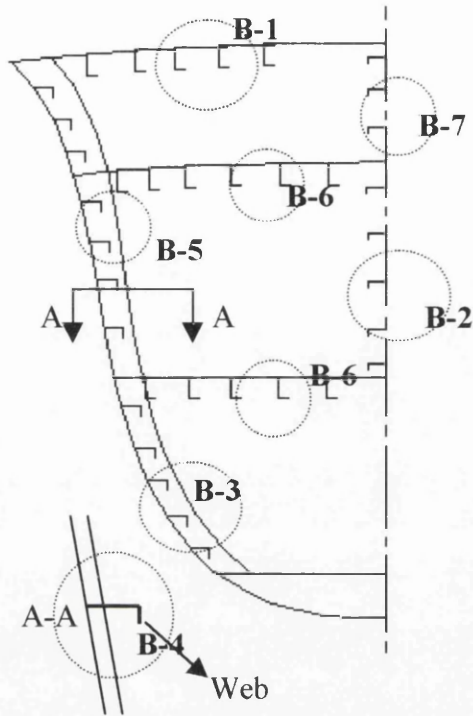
Structural members behind B77 following relevant arrangement with the midship section
